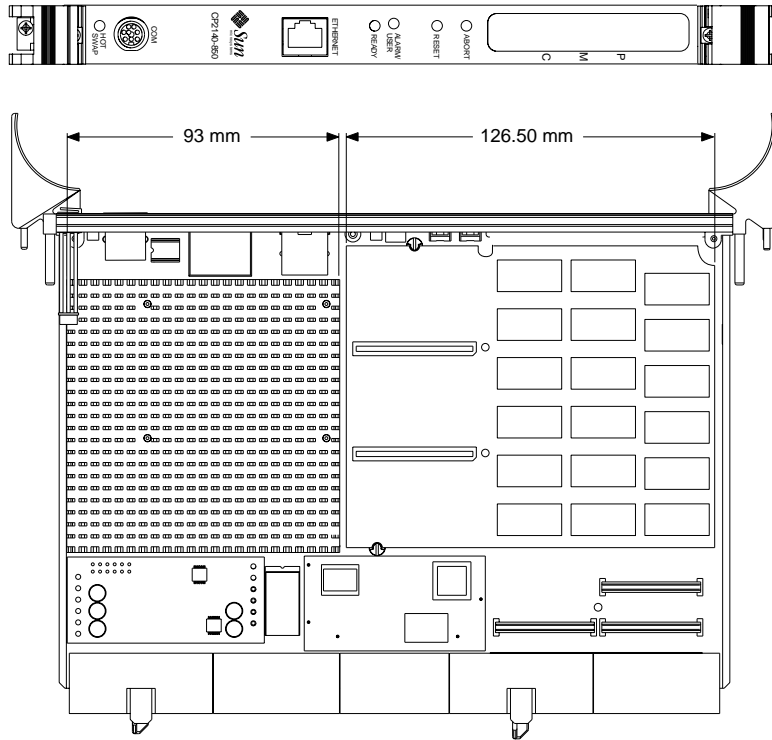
Netra CP2140 Board Mechanical Dimensions of the Heat sink and Double-wide Memory Module
